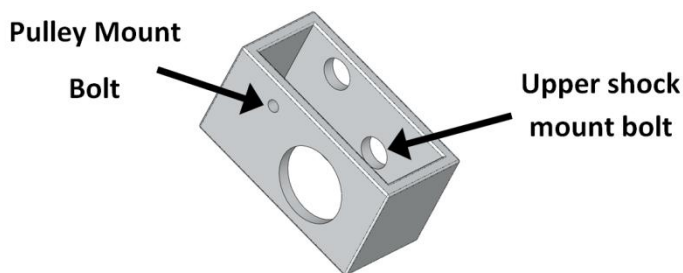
The pulley mount is designed to allow for cable alignment adjustment.
